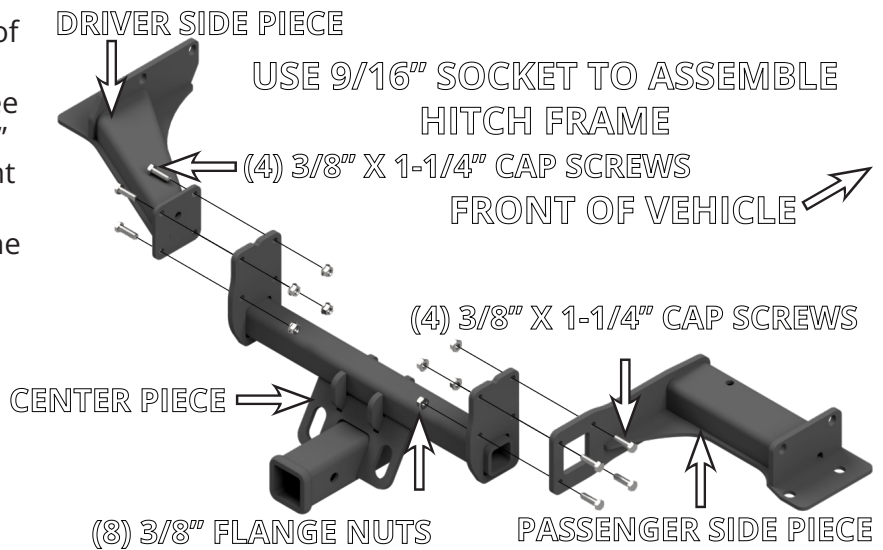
VIEW OF HITCH FRAME ASSEMBLY
